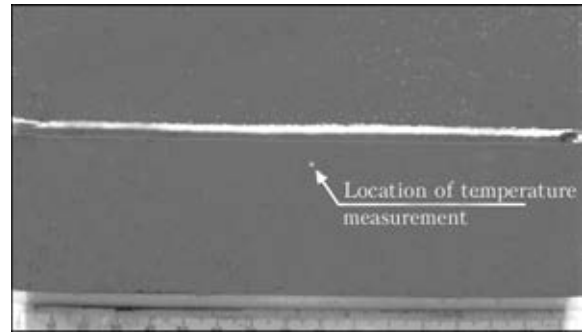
Appearance of EBW weld with a characteristic defect in the form of a crack
